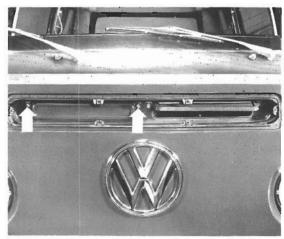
Phillips head screws (arrows) that hold air intake grille and mesh panel.
